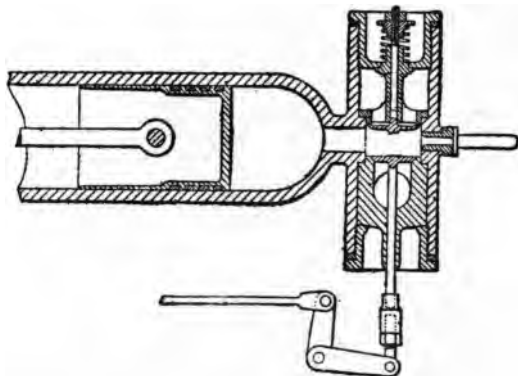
Bollée Admission and Exhaust Valve for Internal Combustion Engines.
